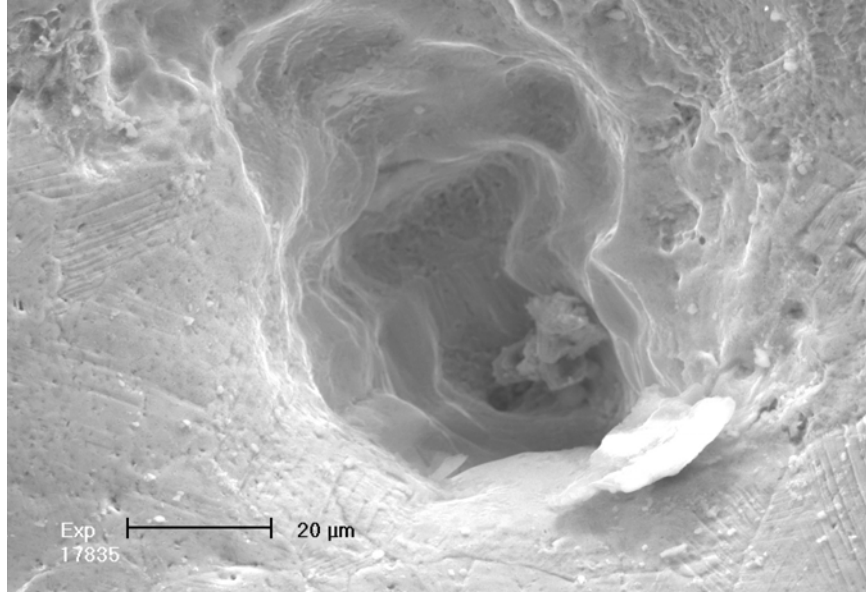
LE4 front flange, heavily damaged region, crater.
